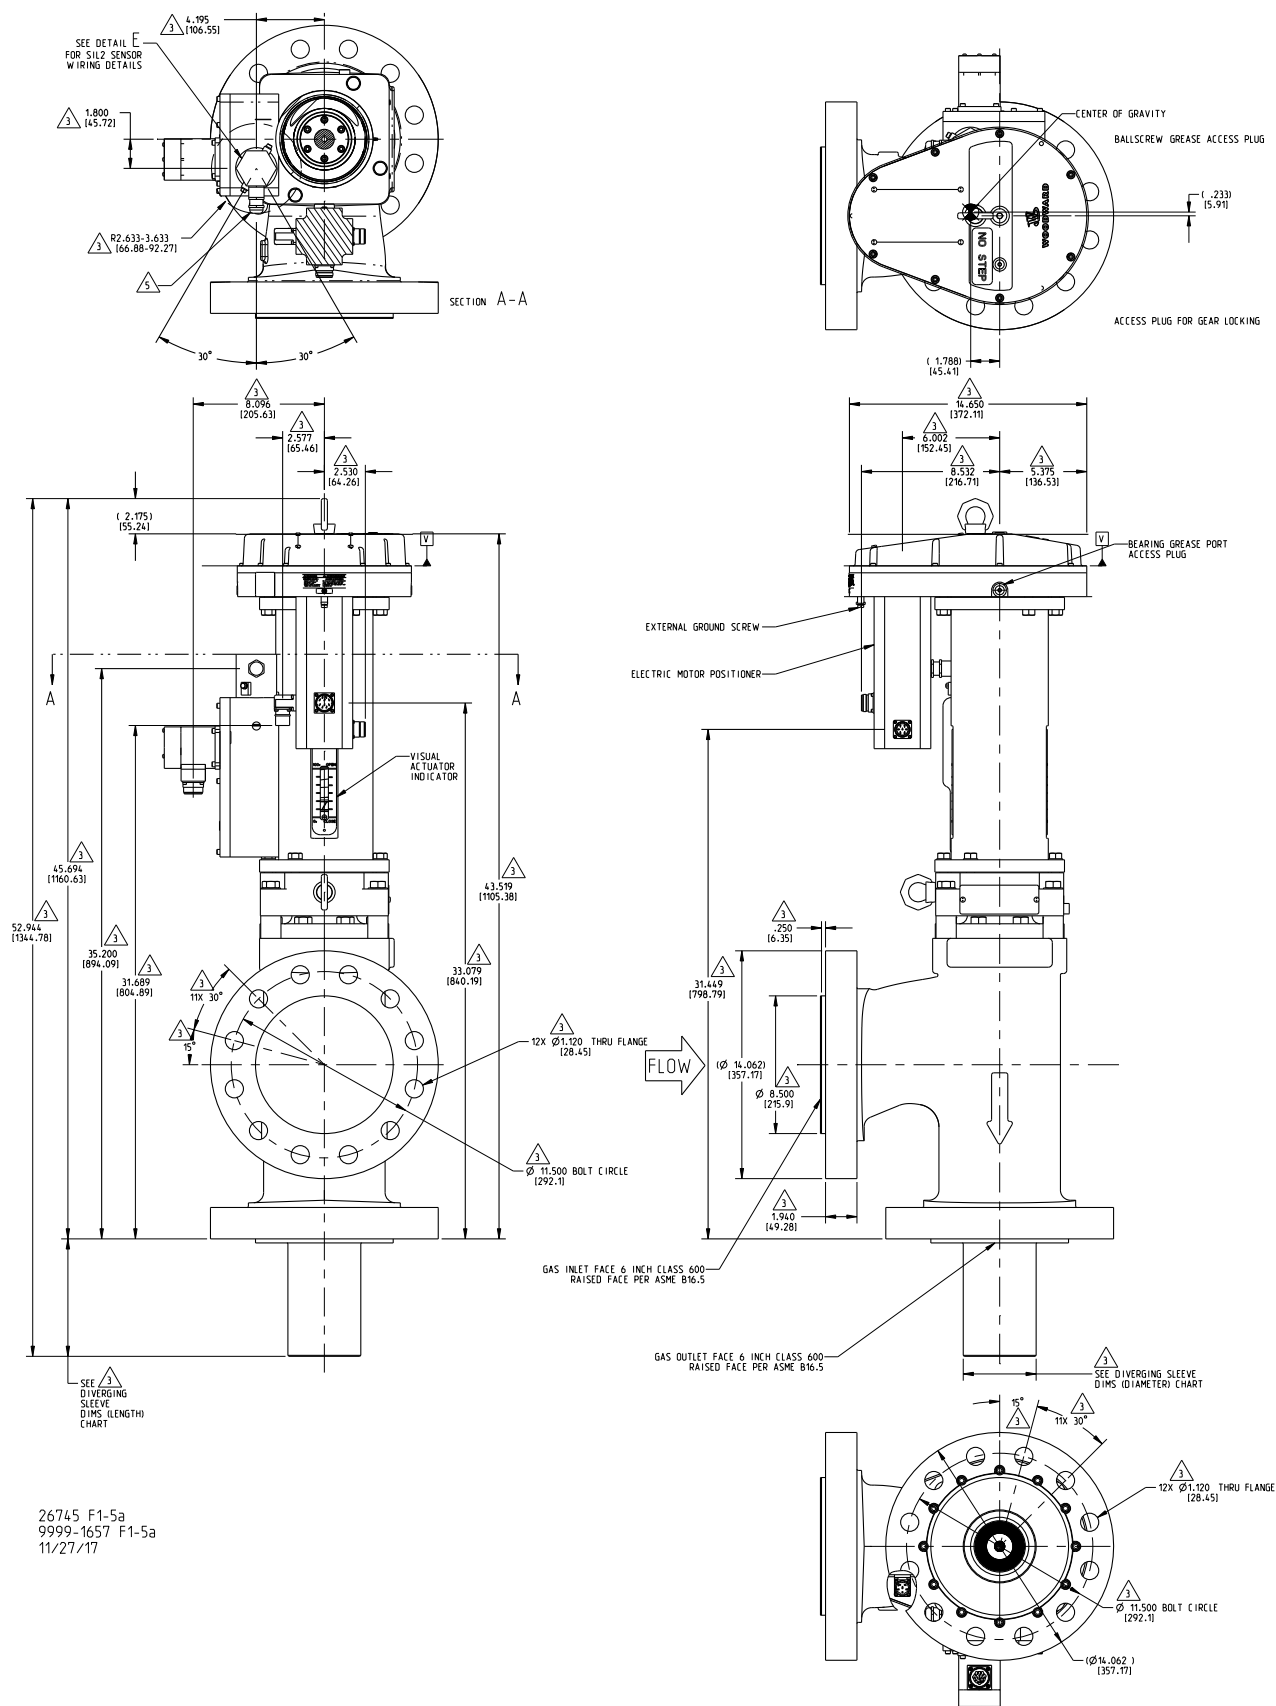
Outline Drawing (6-Inch HR LESV)
